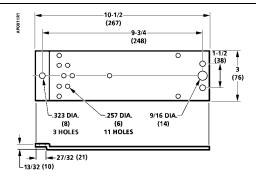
Extended Shaft Mounting Bracket Dimensions. Dimensions are in Inches (Millimeters).
